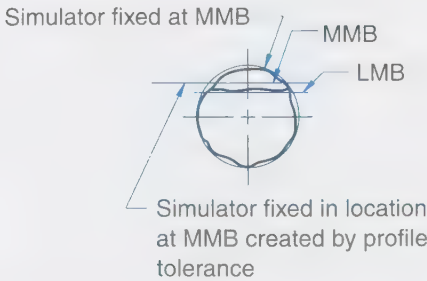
The applicable material boundary modifier impacts the way in which the simulators establish the datums using surfaces.
